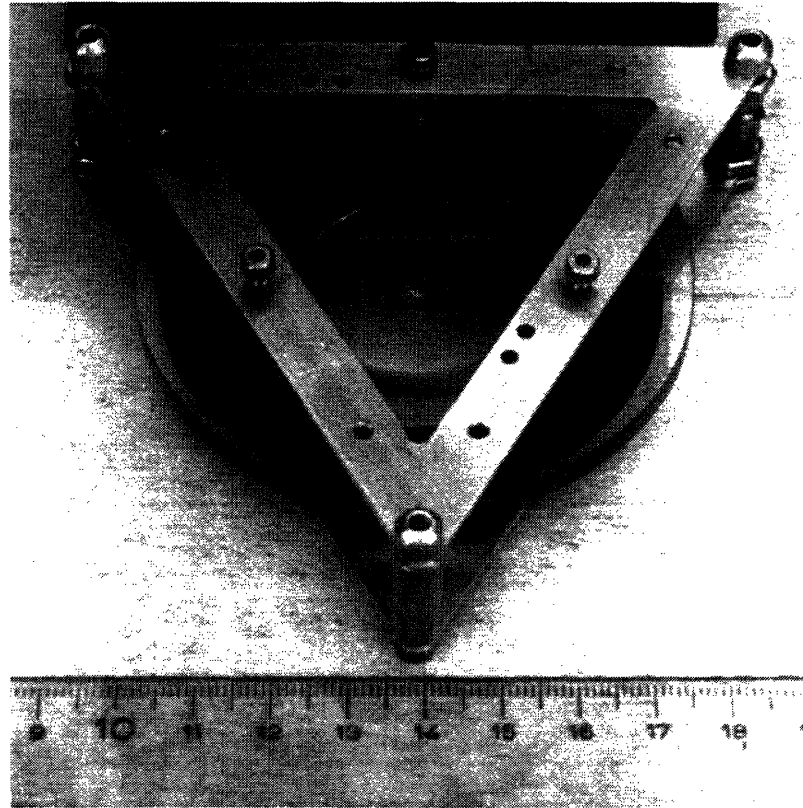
Conformable mask fixture which uses partial vacuum to maintain mask-to-substrate contact during x-ray exposure.
